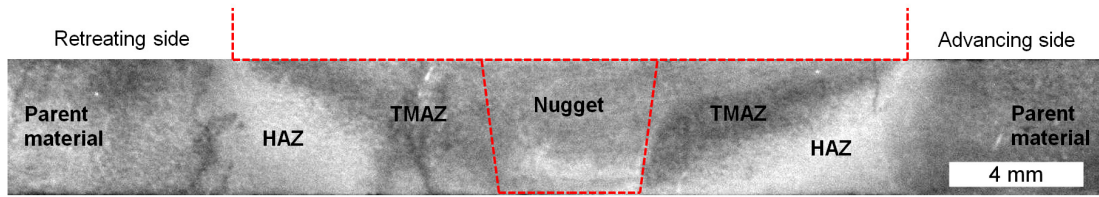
Macroscopic image of the transverse cross-section of the welded plates (tool position represented in red).
